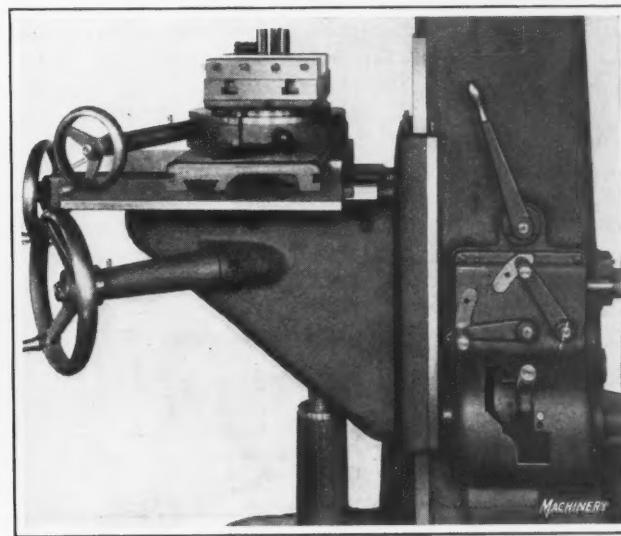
Side View of Machine showing Gear-box and Levers, and Narrow Guide and Square Locks of Slide
